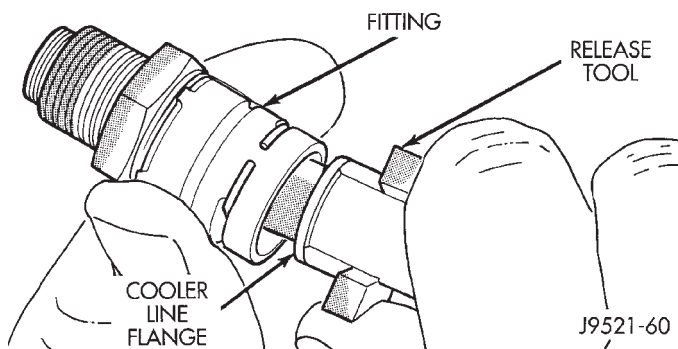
Disconnecting Cooler Line With Release Tool (Type 2 fitting)
